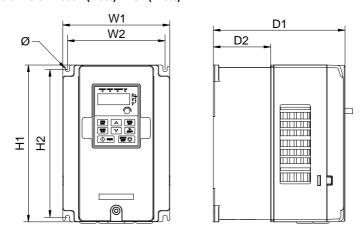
Wall installation diagram for 380V 7.5kW-37kW VFD models
